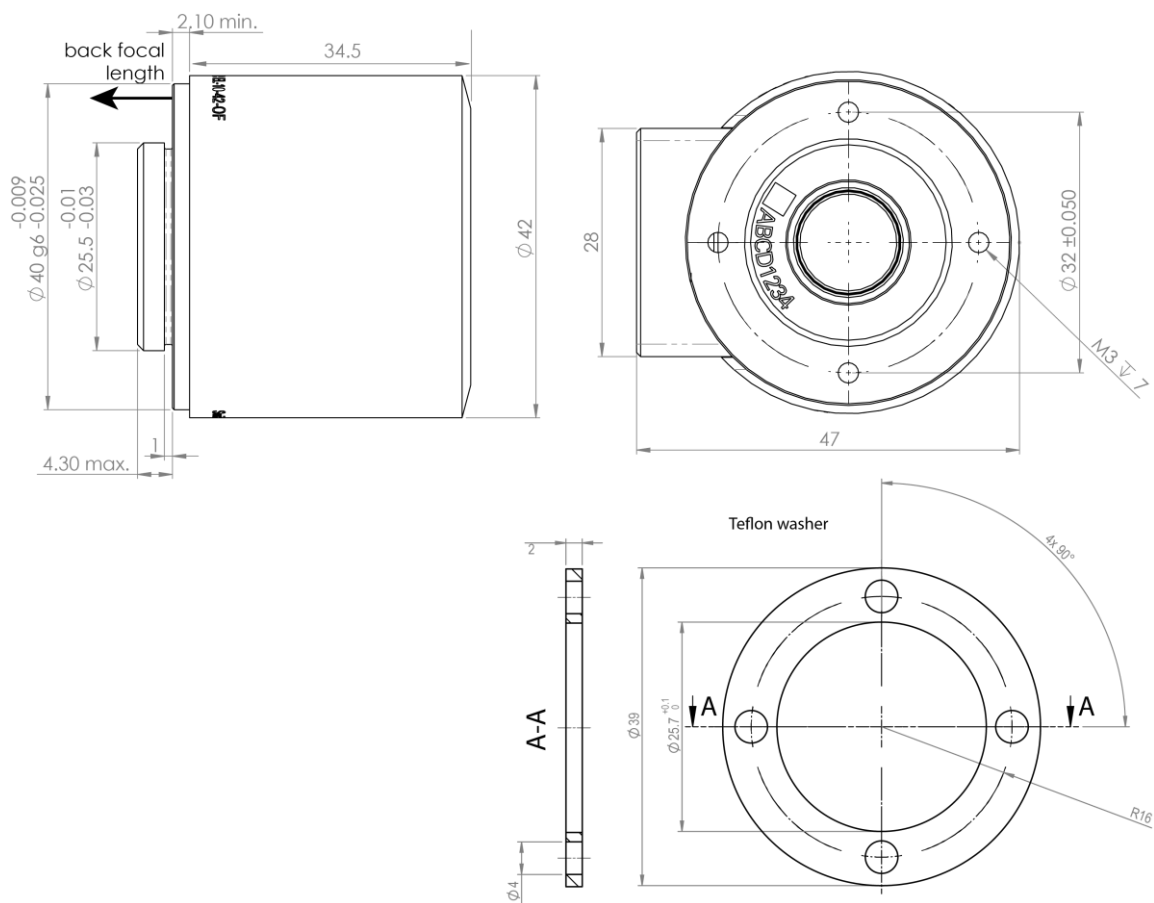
Mechanical drawing of the EL-10-42-OF (unit: mm). Four M3 thread holes are available for mounting. The Teflon washer has a thickness of 2mm and its flatness is tolerated within  $\pm 0.05$  mm.
